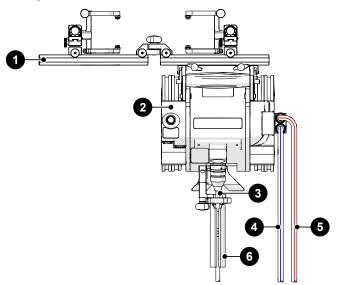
Pivoting probe holder frame configured for flange scanning
